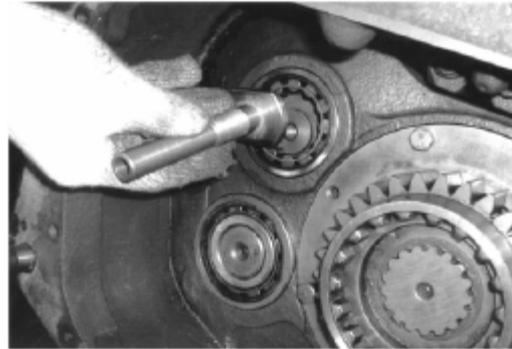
Front Bearing Extractor of Countershaft of Secondary Transmission
